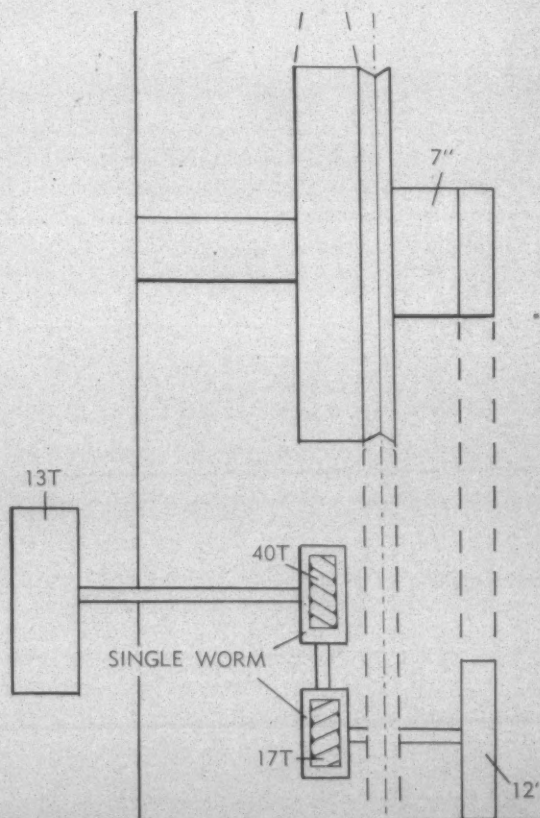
Gearing diagram shows the drive from the cylinder journal to the flat drive gear on card A.
